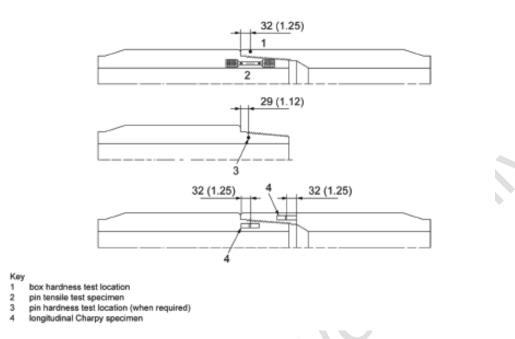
Test Specimen Location and Orientation for HWDP Tool Joints
